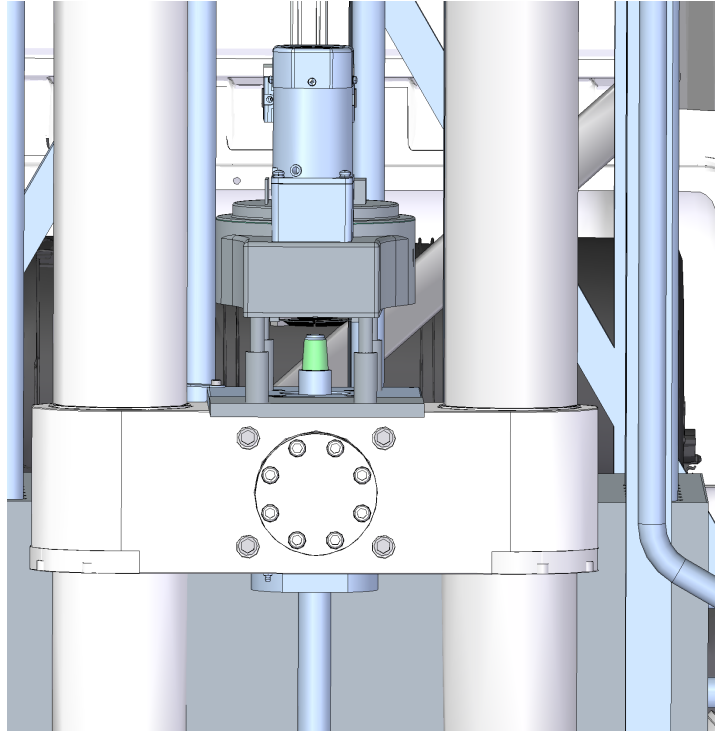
Push Frame Pressing The Tube Into The Ground.
